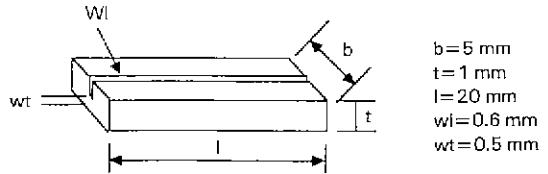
Specimen geometry and dimensions for in-situ DCB test.
